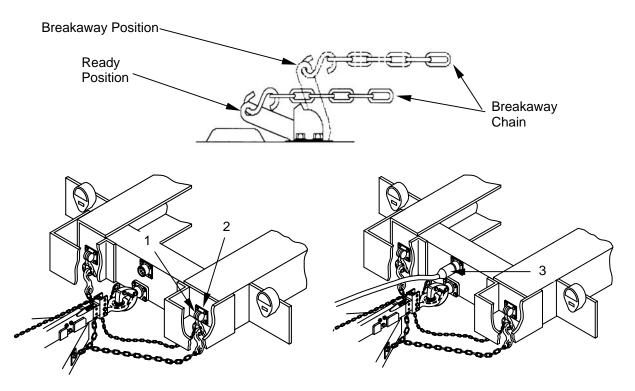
Connecting Breakaway Chain and Inter-vehicular Cable to Prime Mover
